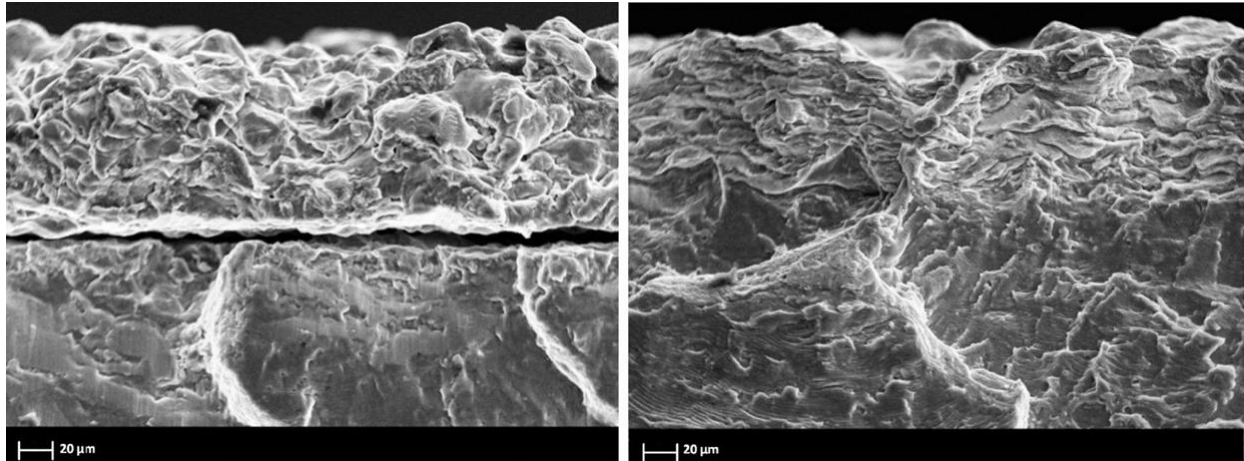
Fracture surface of coated samples with pure aluminum (left) and Al 7075 (right) on Al 5052 [38]
